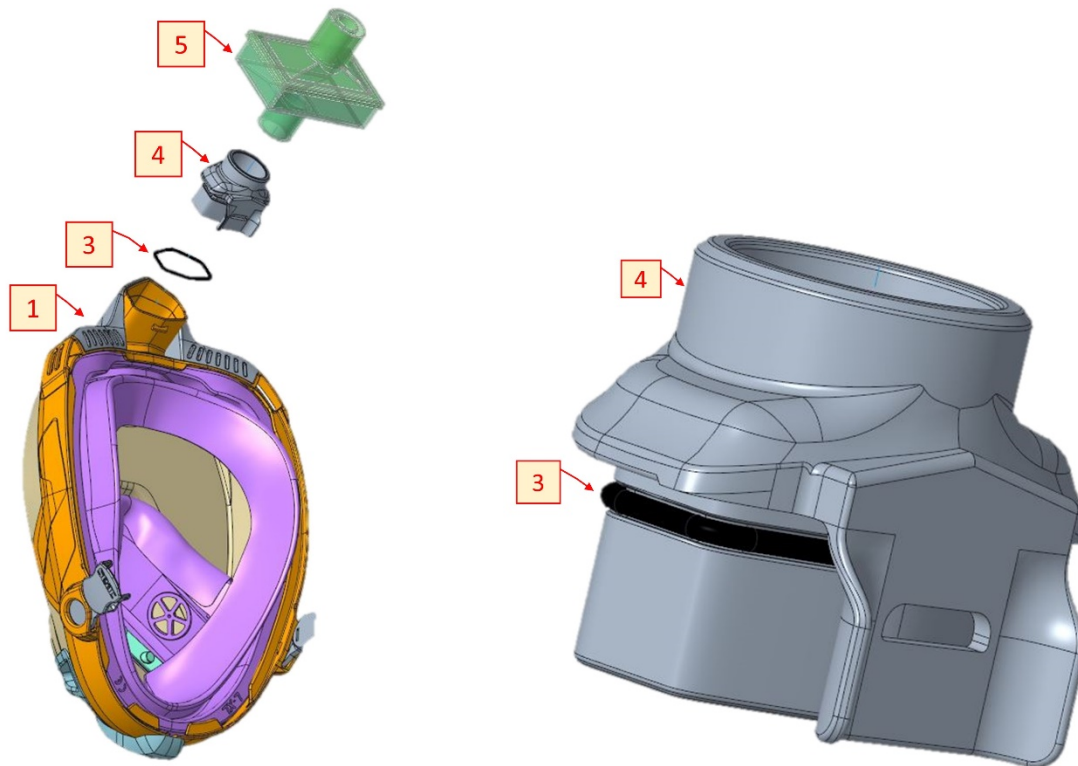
Left: Assembling of transformed Seac full face mask. Right: Close up of adapter and o-ring.
